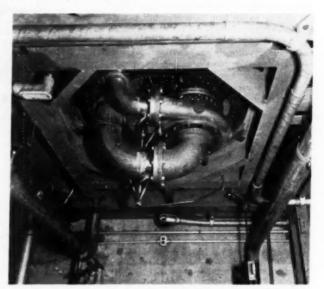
INSTALLATION VIEW OF PUMP LOOKING UP AT THE PUMPING ELEMENTS WITH THE DRAIN TANK REMOVED
